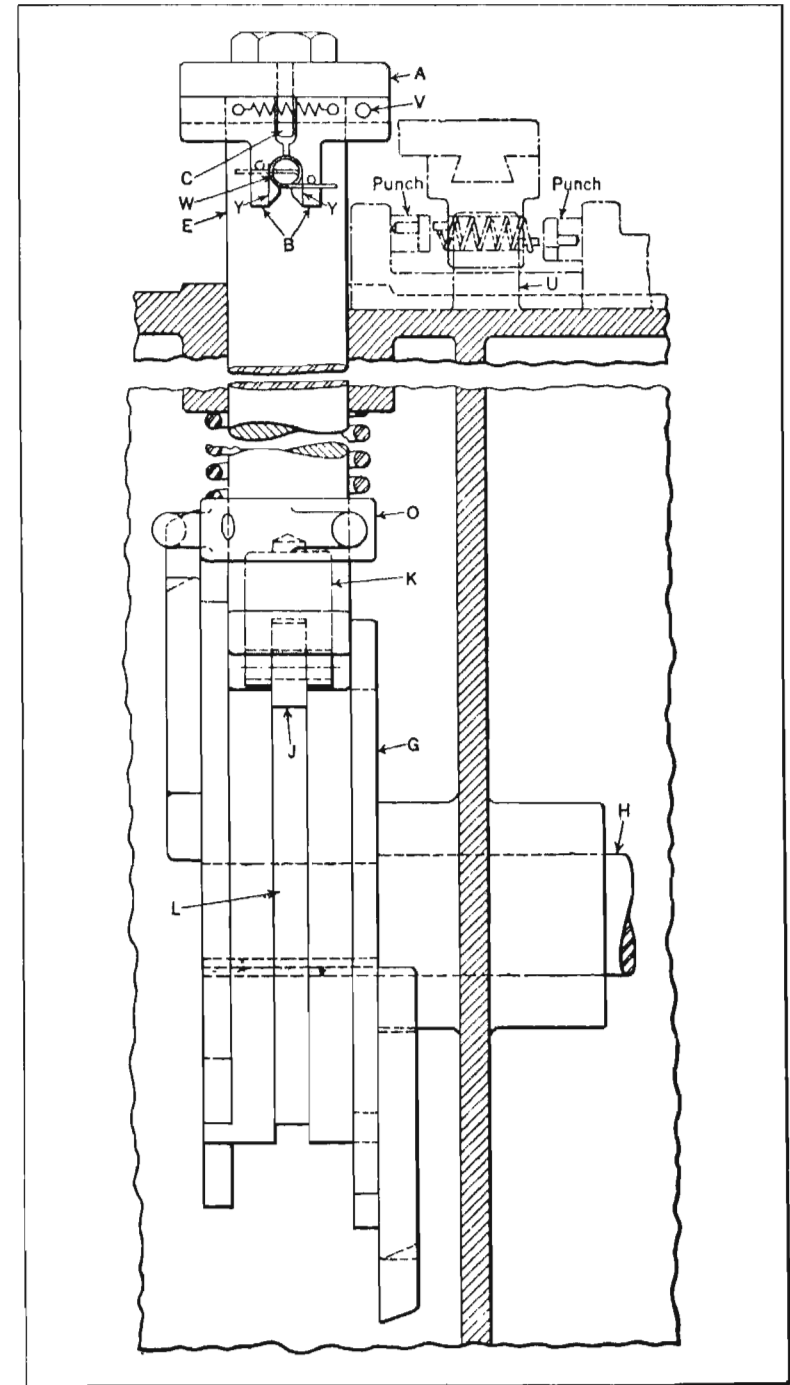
Side View of Cam Mechanism Shown in Fig. 33
